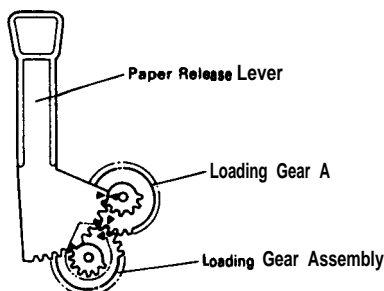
Paper Loading Lever, Loading Gear A, Loading Gear Assembly Setup
